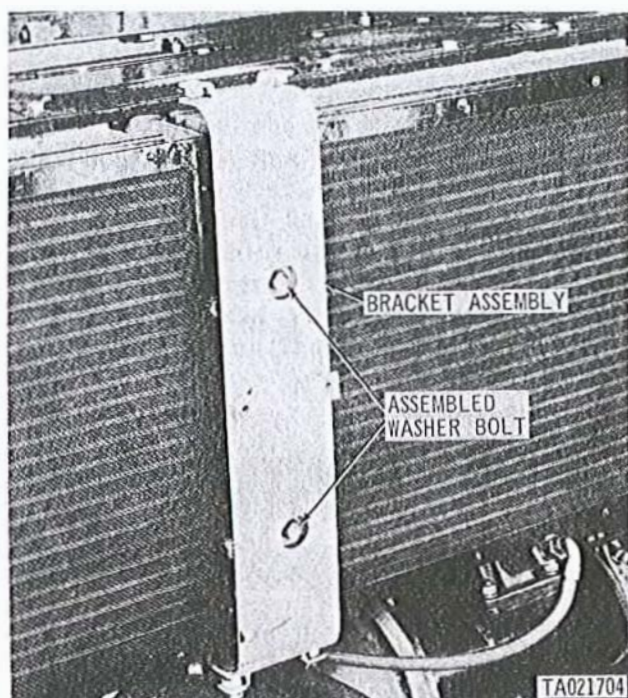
Removing or installing generator cable and wiring harness bracket.
